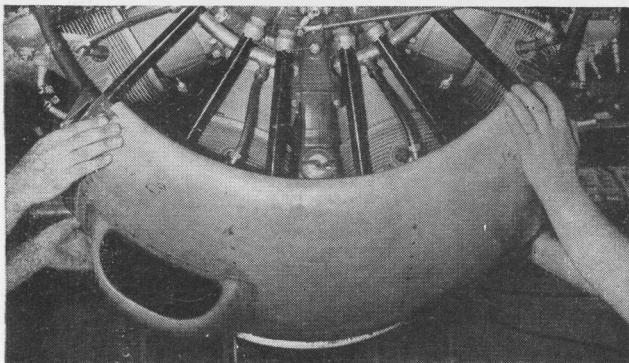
The lower section of the ring cowl illustrating a built-in duct for the oil cooler.
